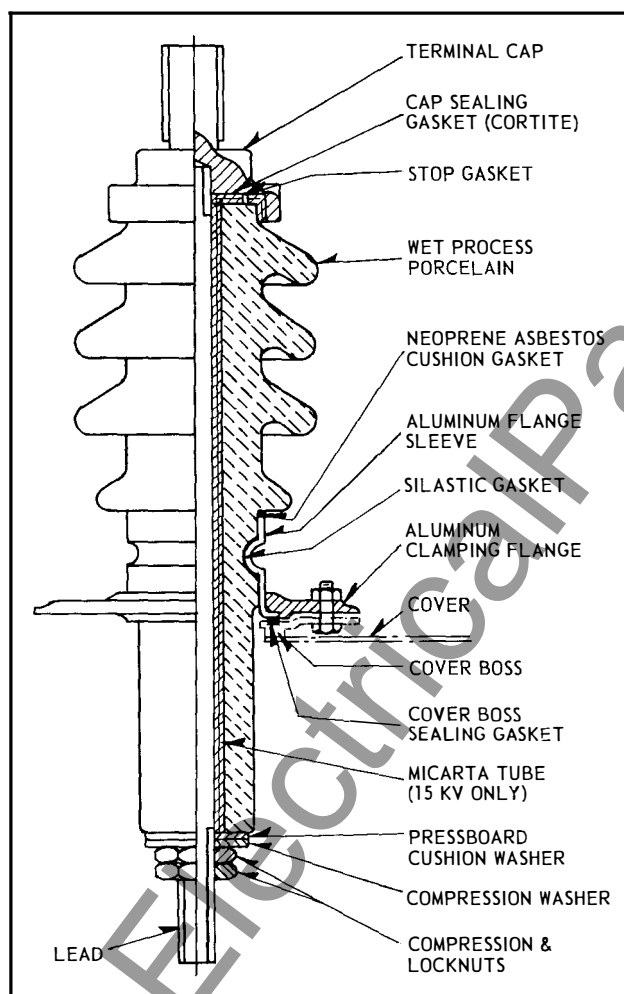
Typical Cross-Section of "RJ" Porcelain Bushing.
